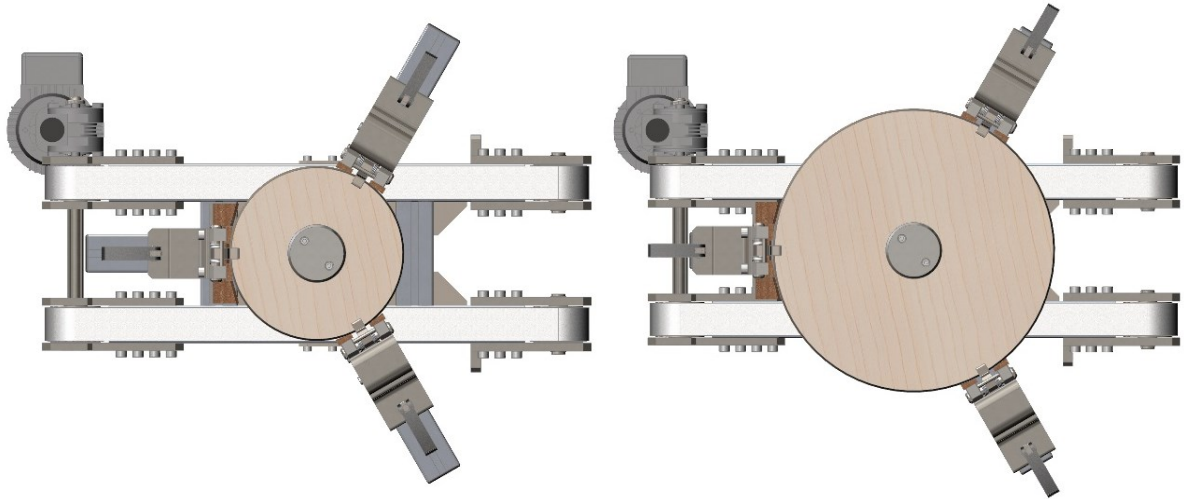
The layout of the stacking conveyor. Left – with 210mm core plug. Right – with 350mm core plug.
